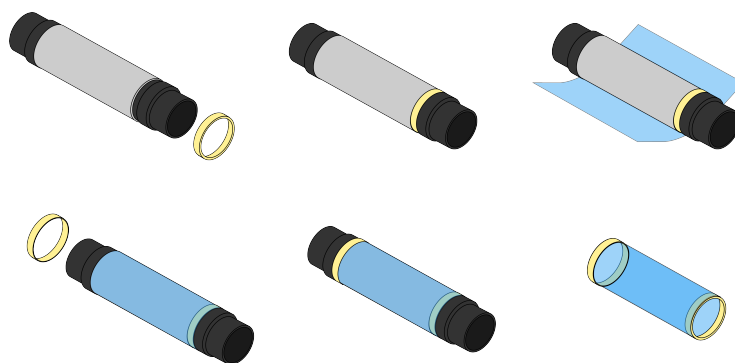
Drawing of the preparation of a sub-layer. From left to right, top to bottom: inner-ring placed on the mold; wrapping of the GEM foil; installation of the outer-ring; final gluing; sub-layer ready. Reprinted with permission from Reference [26].
